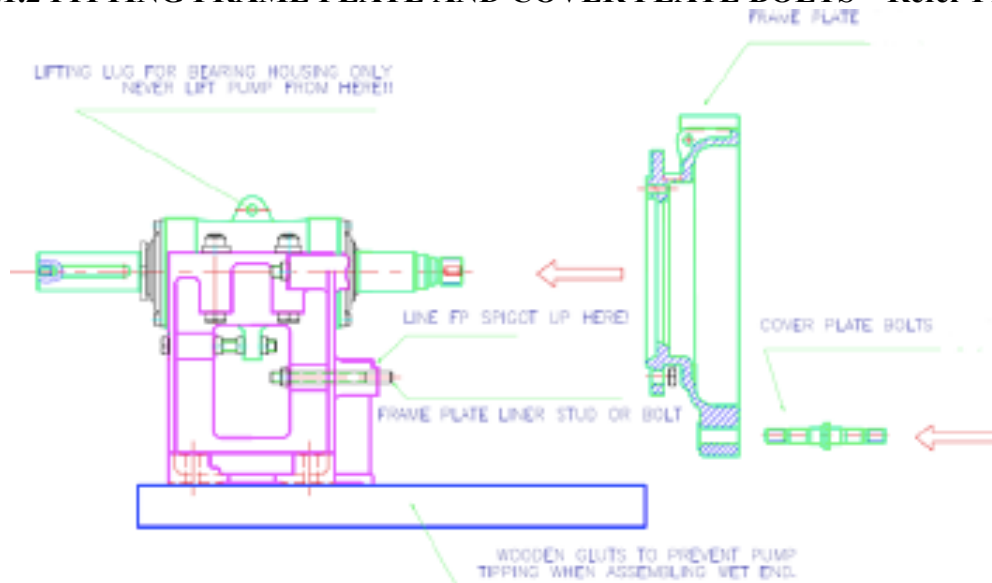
Assembling Frame Plate and Cover Plate Bolts
